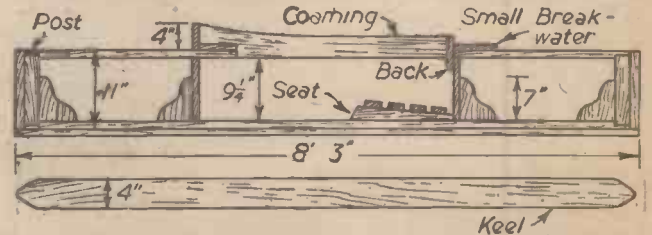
A sectional view, with hull board removed, and details of the keel.
